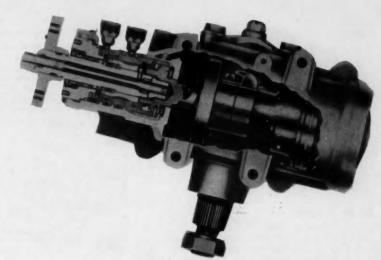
Cross-section of Saginaw rotary valve gear. Valve is at extreme left. Handwheel is connected to valve by small torsion bar, which deflects to produce rotary motion for valve actuation.
